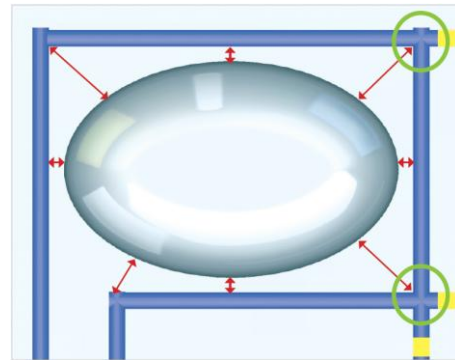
Conventional tooling mold temperature control. Uneven distances to the cavity surface throughout the length of the channels (Source: [5])
